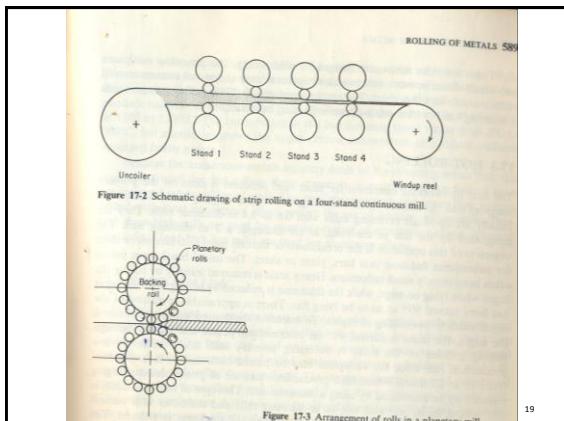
Schematic drawing of strip rolling on a four-stand continuous mill.
